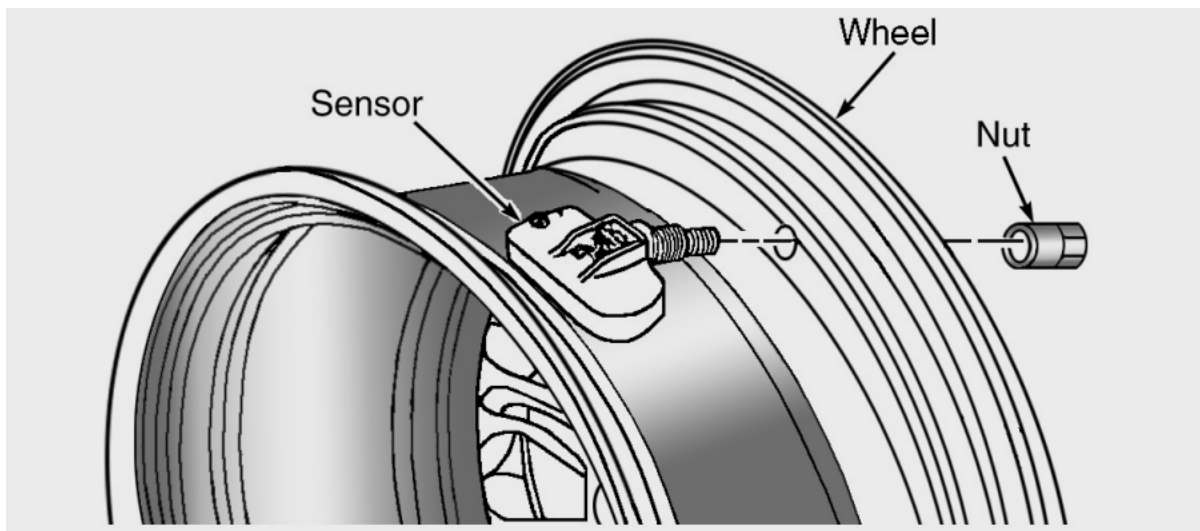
Removing & Installing Tire Pressure Sensor (SRT8)
